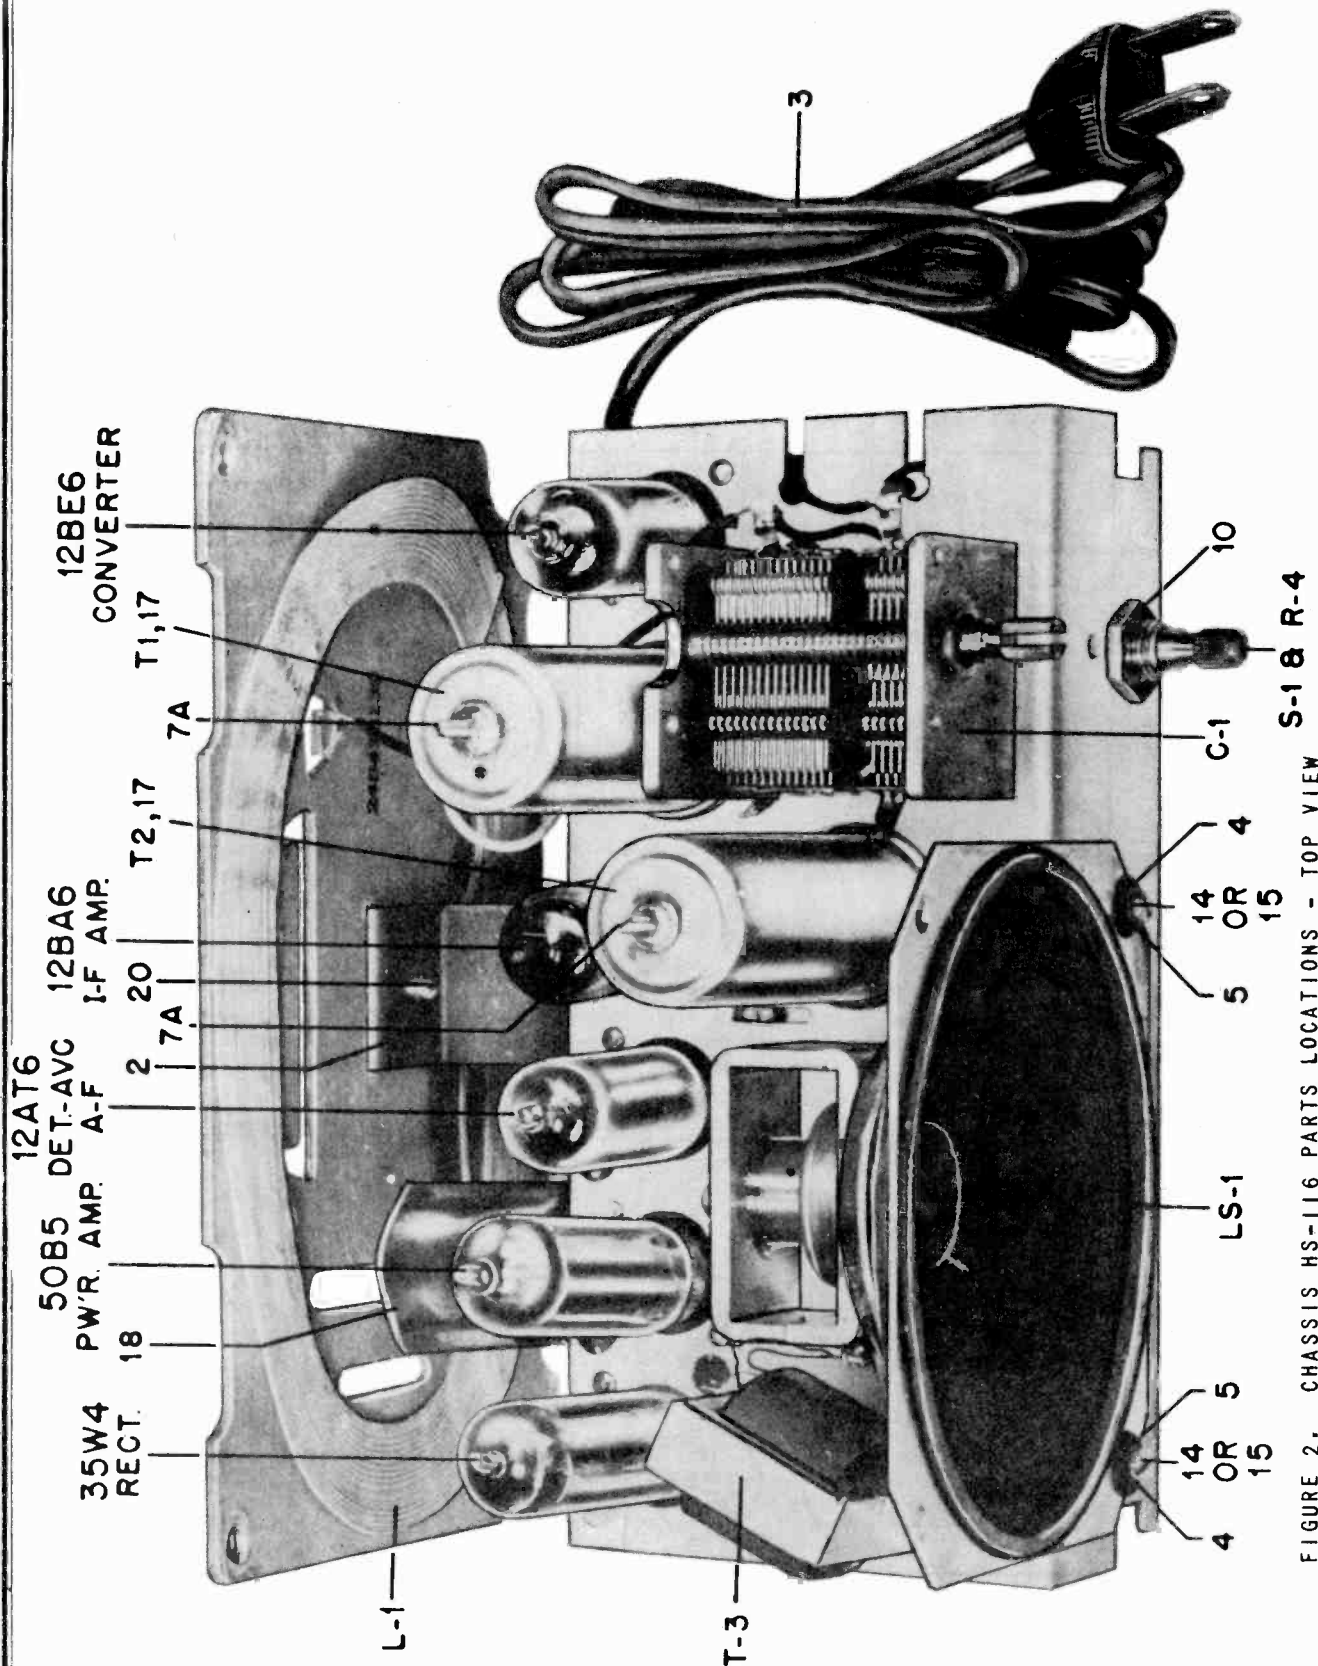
CHASSIS HS-116 PARTS LOCATIONS - TOP VIEW
